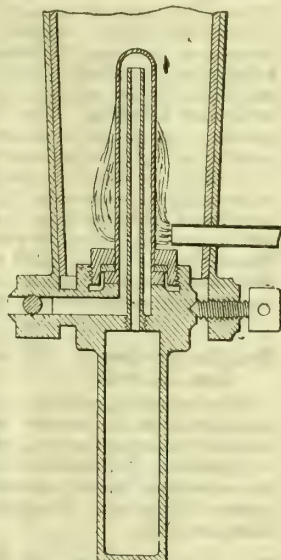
PORCELAIN IGNITION TUBE AND HOLDER.
